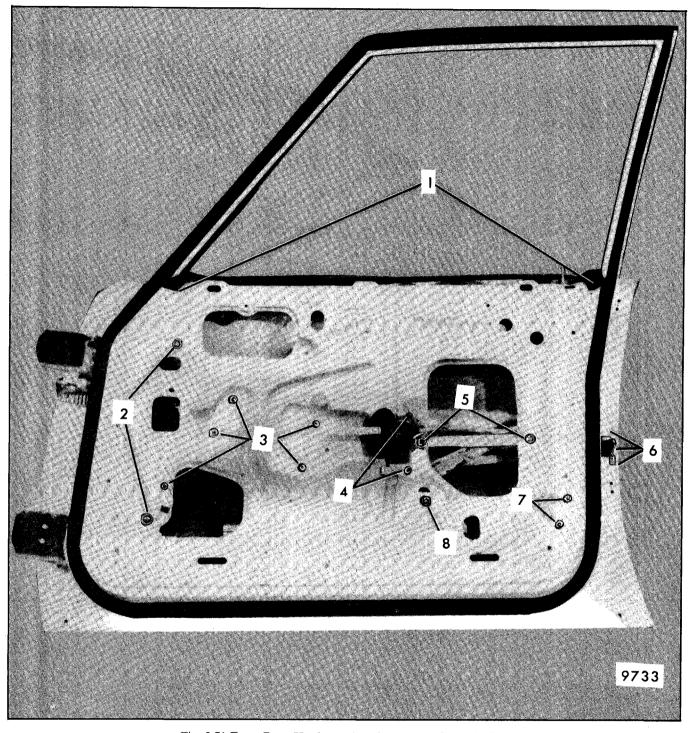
Front Door Hardware Attachments - A Sedan Styles
